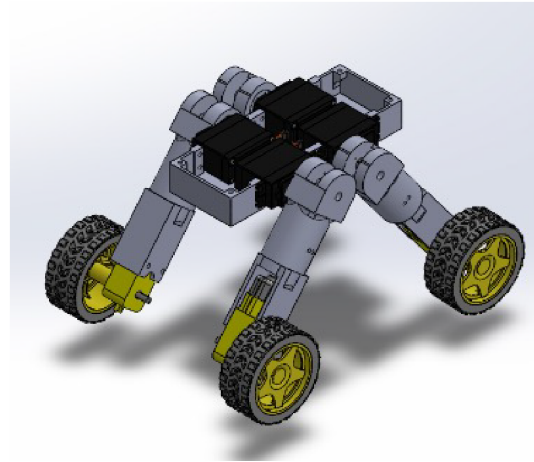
Three-dimensional assembly of the ALLQU robot in SolidWorks.
